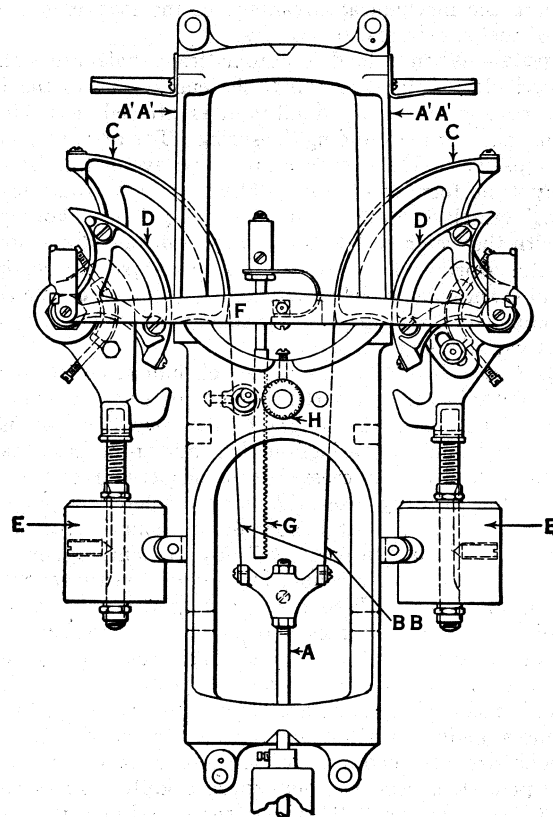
MECHANISM OF THE "TOLEDO" SELF-INDICATING PLATFORM MACHINE
